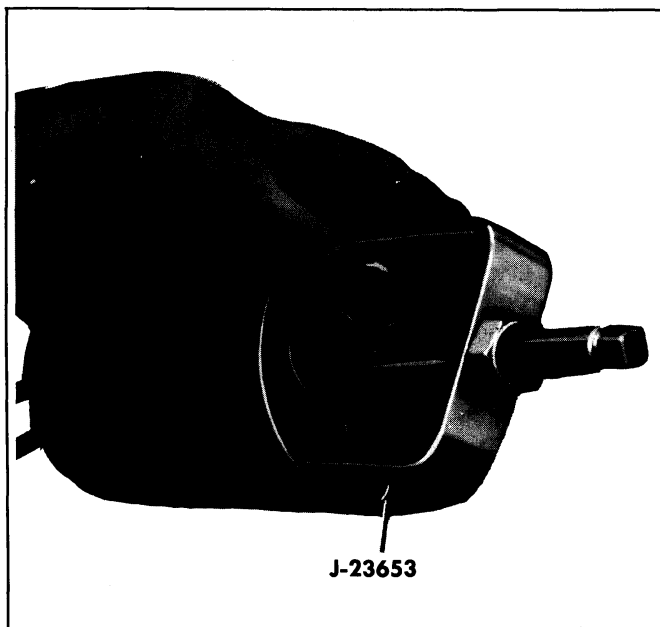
B-66—Removing Carrier and Lock Plate Retaining Ring Using Tool J-23653
